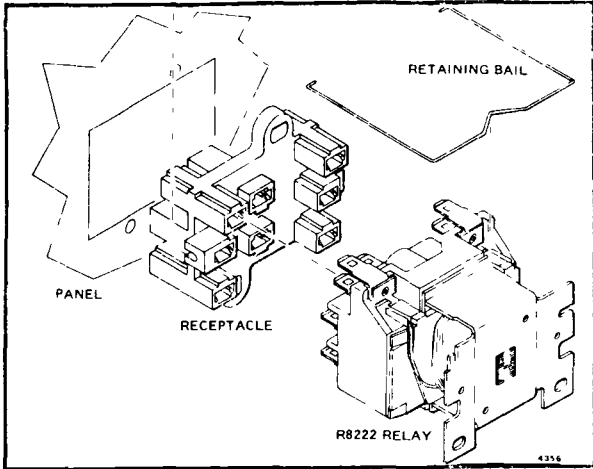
RELAY MOUNTING USING RECEPTACLE AND RETAINING BAIL.
